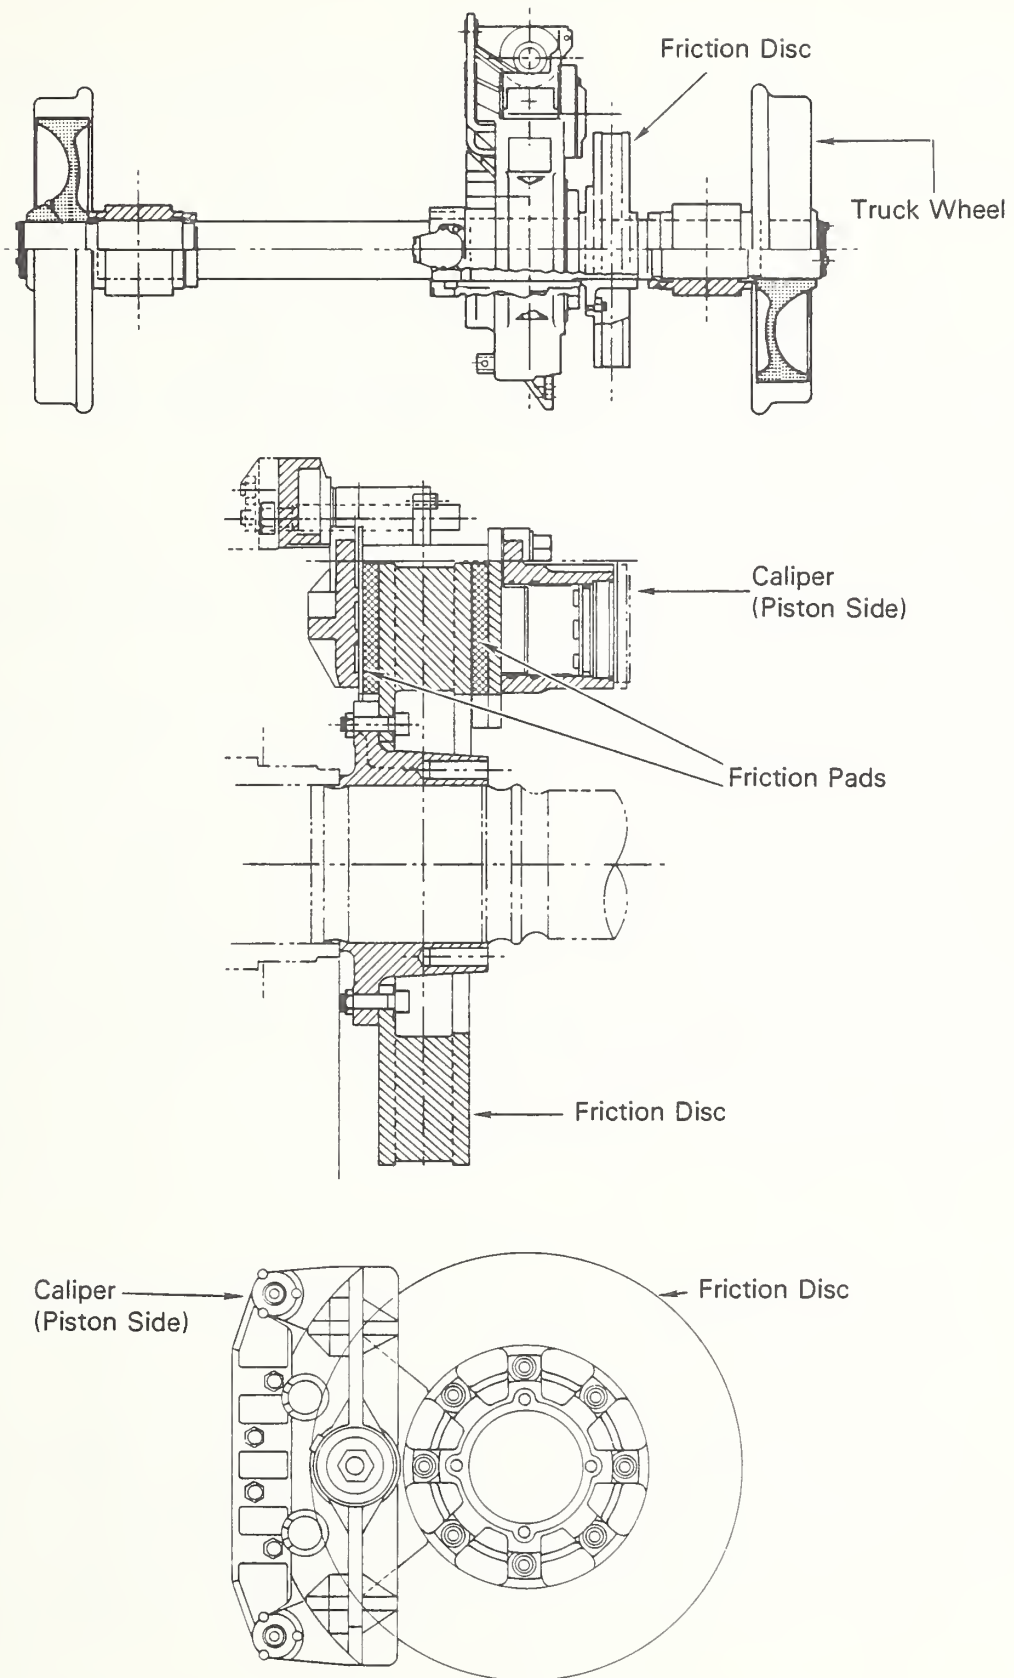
BART RAIL TRANSIT VEHICLE DISC BRAKE ASSEMBLY
